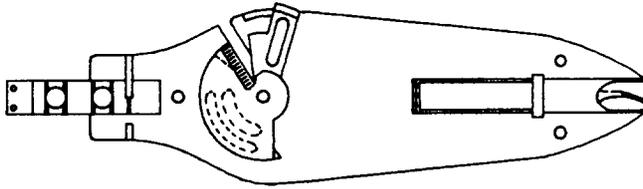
950A Jumper Wire Cutoff, Insertion, and Removal Tool
